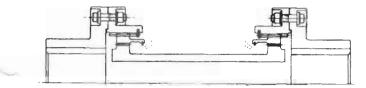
Marine Style Gear Coupling Generally Continuous Lube but Also Used in Pack Lubed Configurations (Accessory Drives for Gas Turbines).
